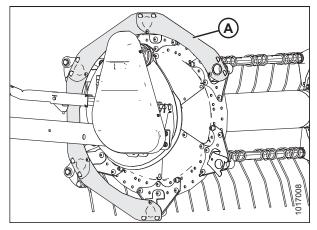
Reel Endshield – Cam End Shown; Tail End Similar
